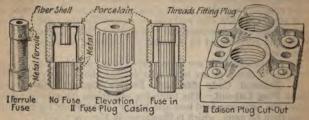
Edison plug cut-out and Edison fuse plug casing.
